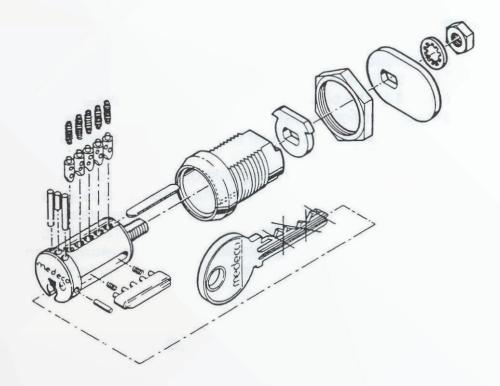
This image provides an exploded view of a Medeco Series 60-65 cam lock.
